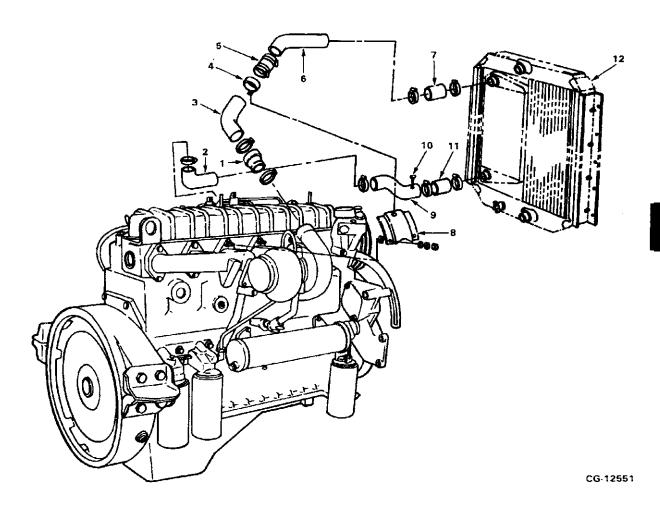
Typical Chassis Mounted Charge Air Cooler Assembly
